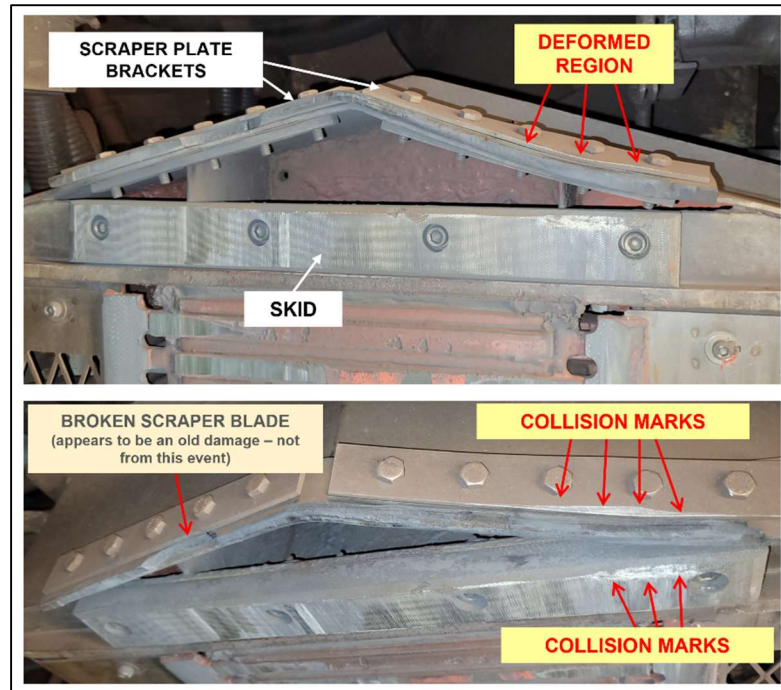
Scraper Blades and Skid Damage on Truck S/N 048
